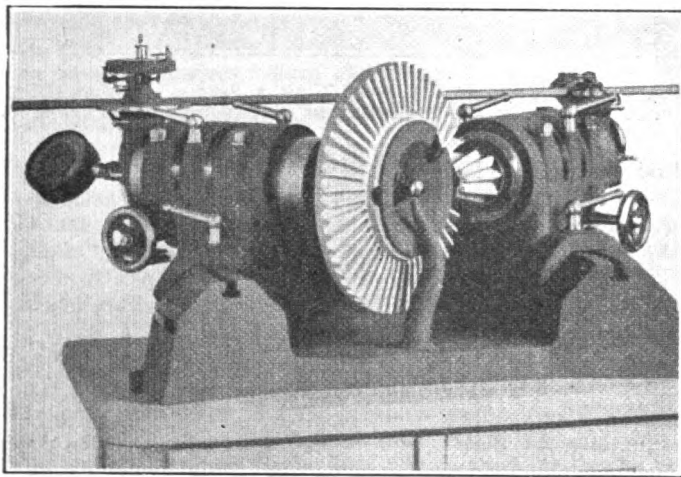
GENERAL VIEW OF A MACHINE THAT HAS BEEN DEVELOPED FOR TESTING THE ACCURACY OF BEVEL GEARS
